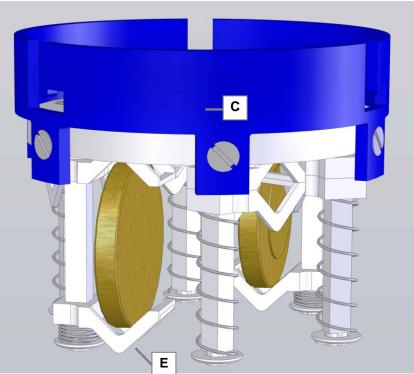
Movement holder with clamped parts (simplified display).
